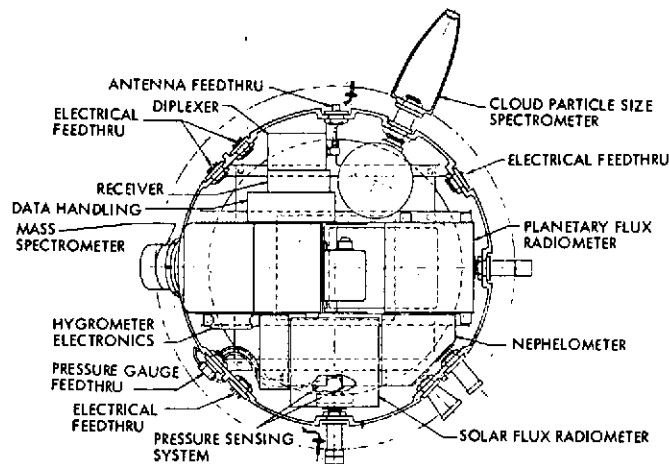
Plan View of Equipment Ring Assembly Showing Instrument Electrical Feedthroughs
